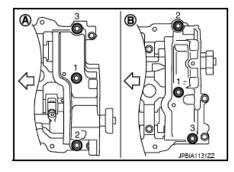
Rear Actuator Bracket Mounting Bolt Tightening Sequence Courtesy of NISSAN NORTH AMERICA, INC.
